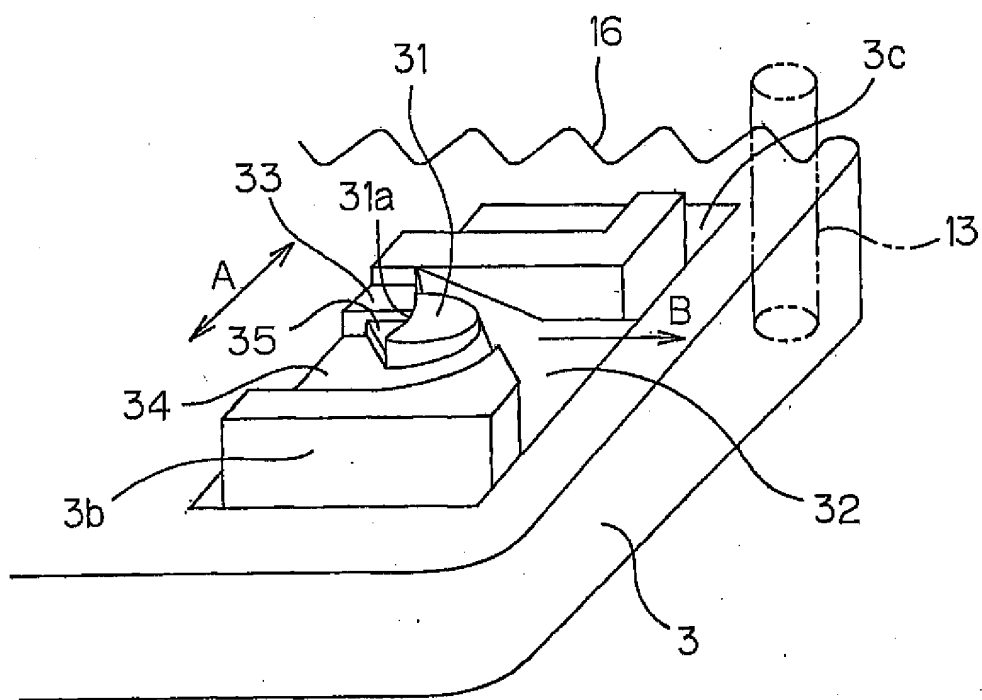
is a plan view with the partition plate 11 removed (The pin 13 secured to the partition plate 11 is actually not seen, but is imaginarily illustrated in Figs. 3 and 7). The rectangular test strip holding table 3 is so disposed as to be inserted into the test strip measuring device main body 1, and is provided at one side thereof with
